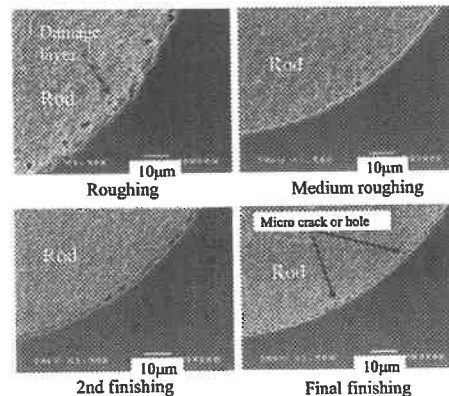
Damaged layer of W rod after electrical discharge machining
